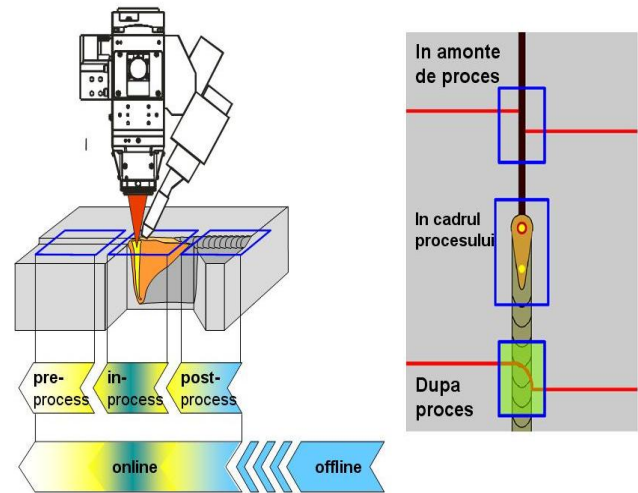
Categories and types of sensors used in LaserHybrid welding
